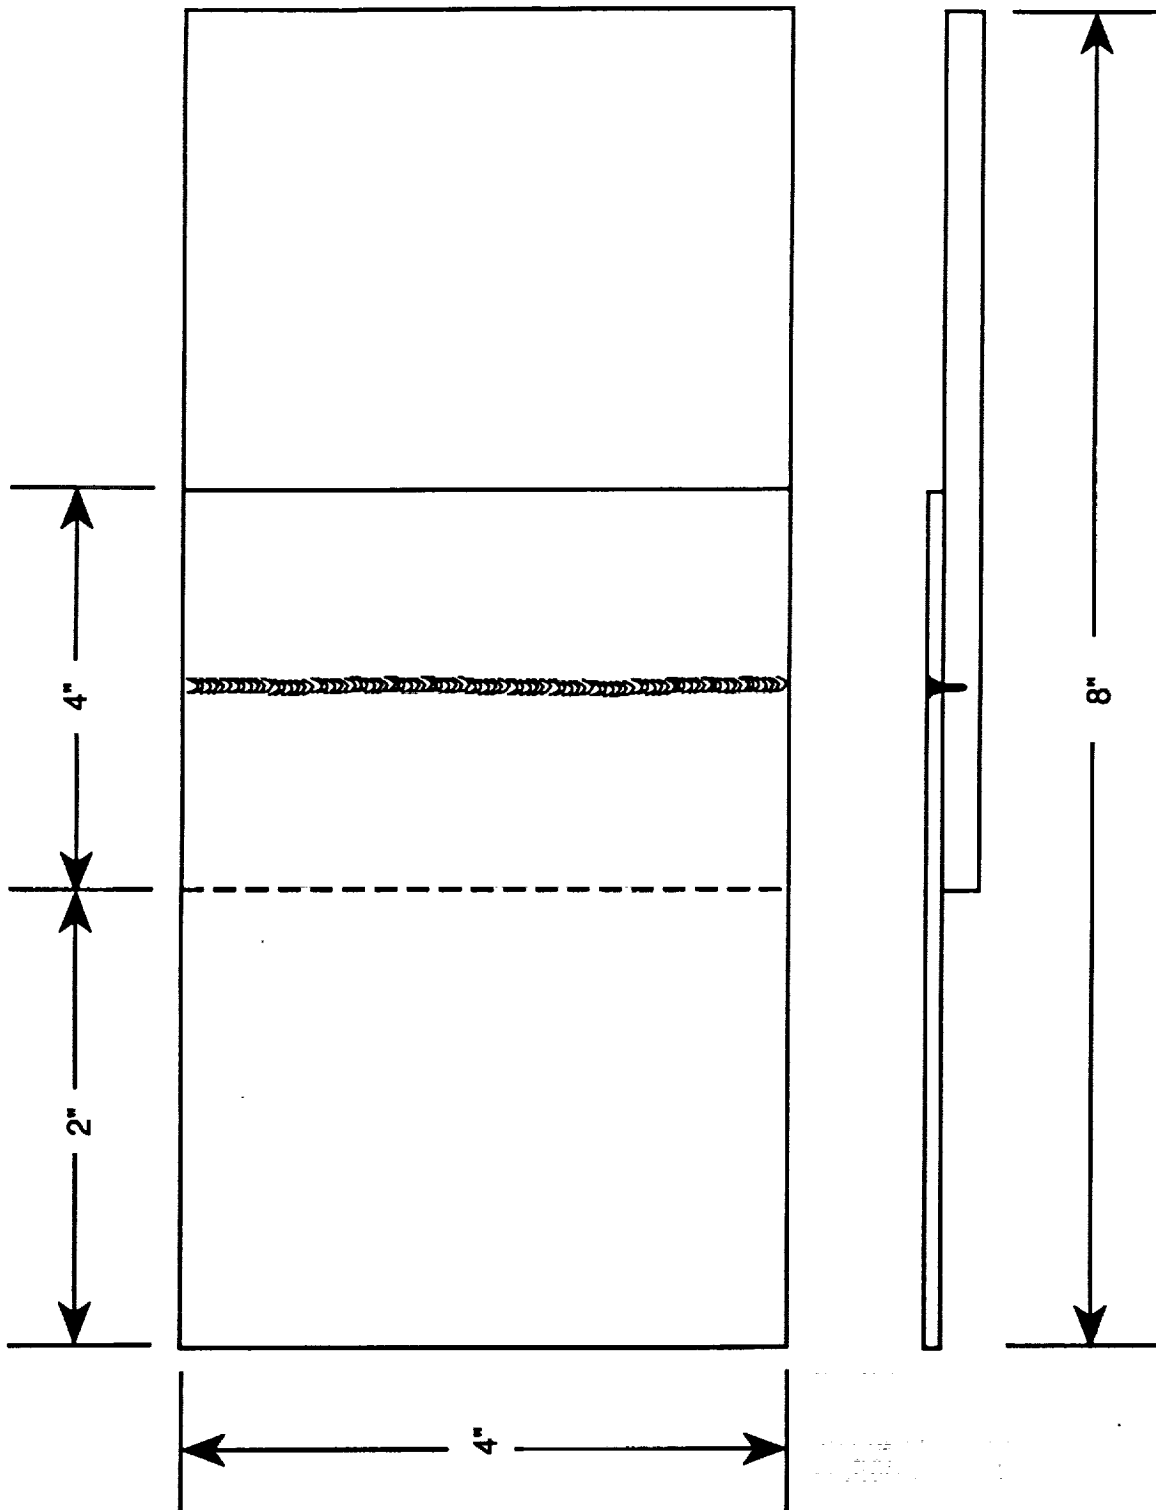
Configuration of Weld Specimen Used to Obtain Weld Shear Strength Samples.
